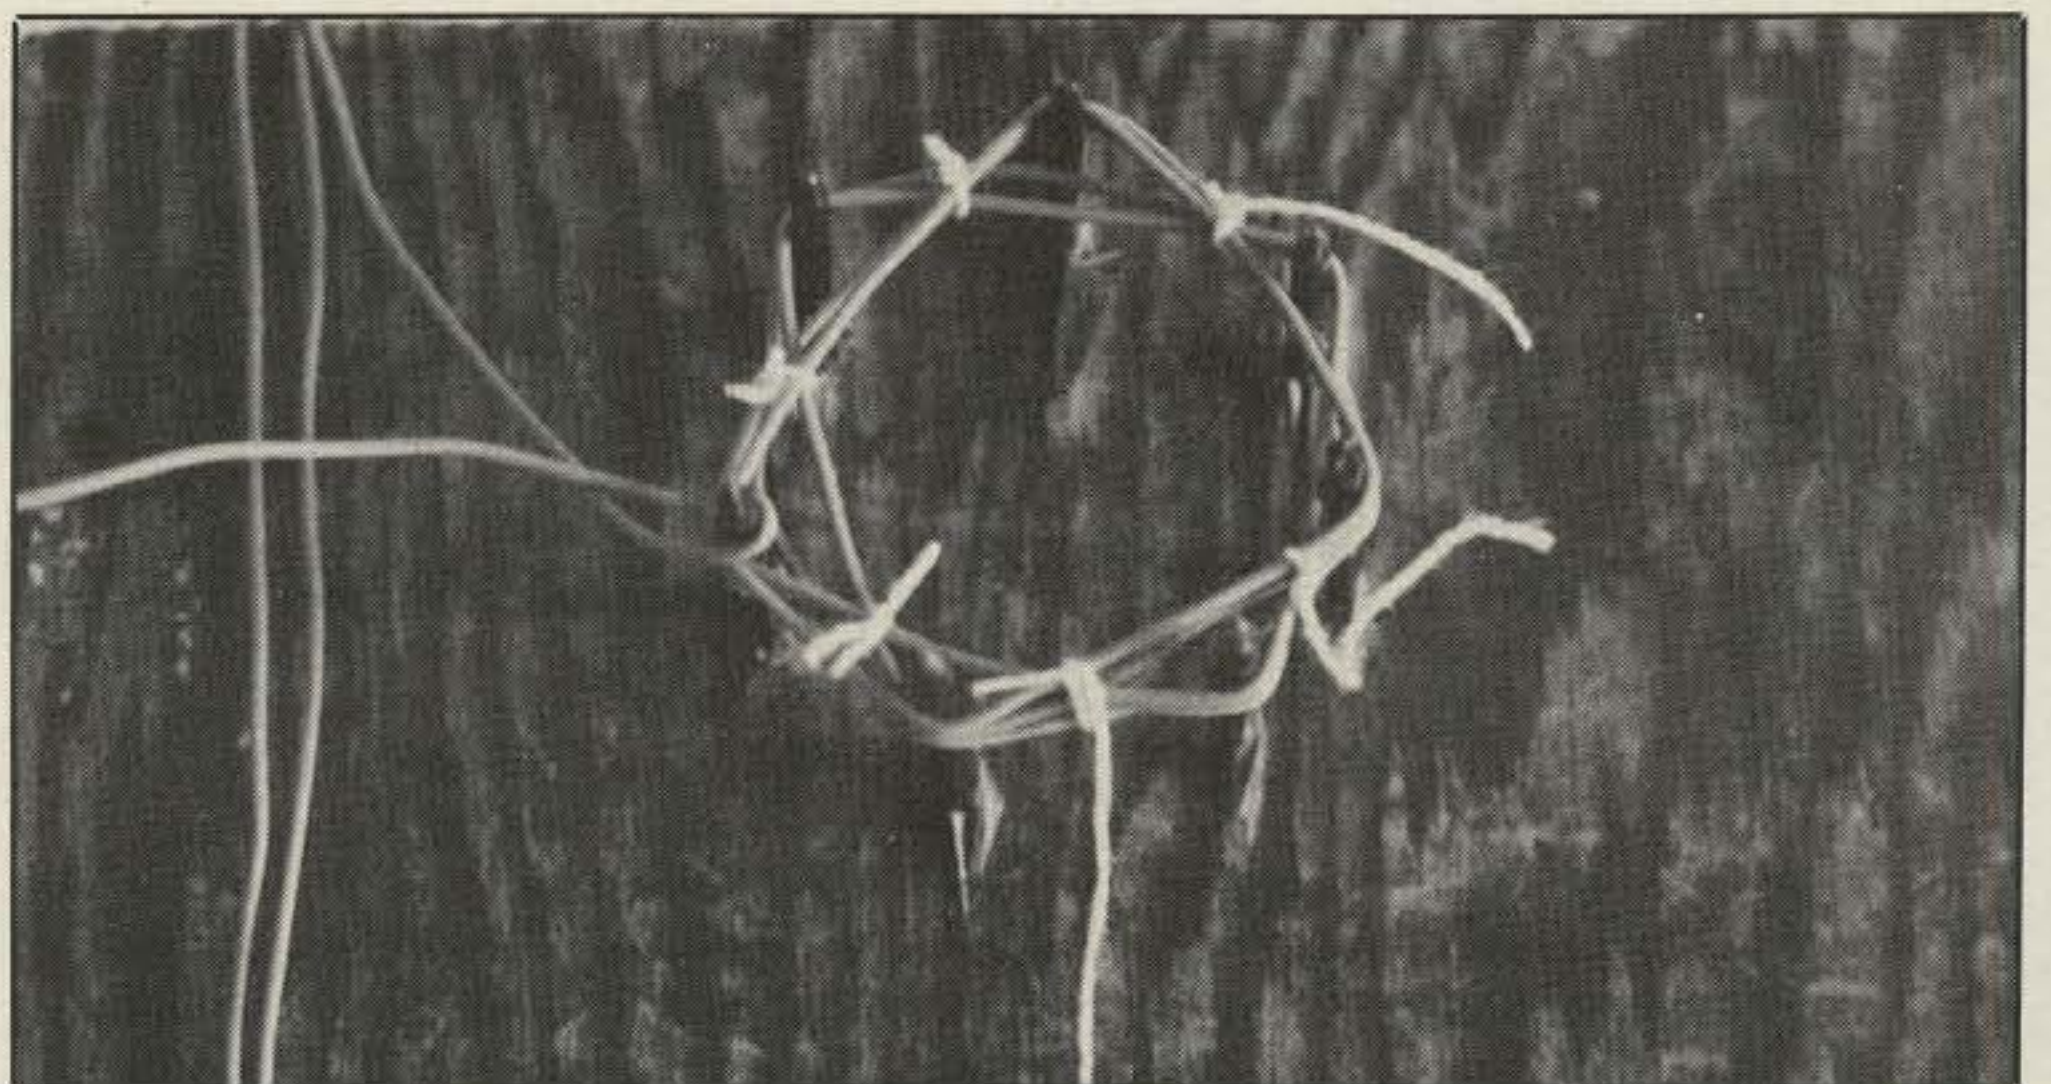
Coil winding jig made by driving seven nails through a board. Secure coil with kite cord before removing. Cut cord excess for neatness.
